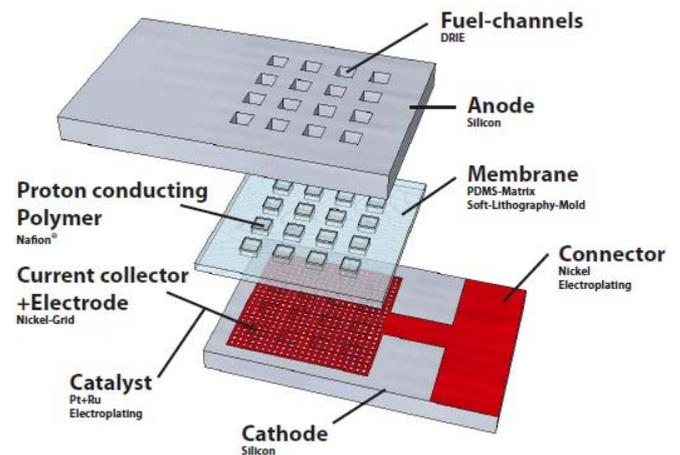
Exploded view with detail and all parts of the proposed micro fuel cell identified.
